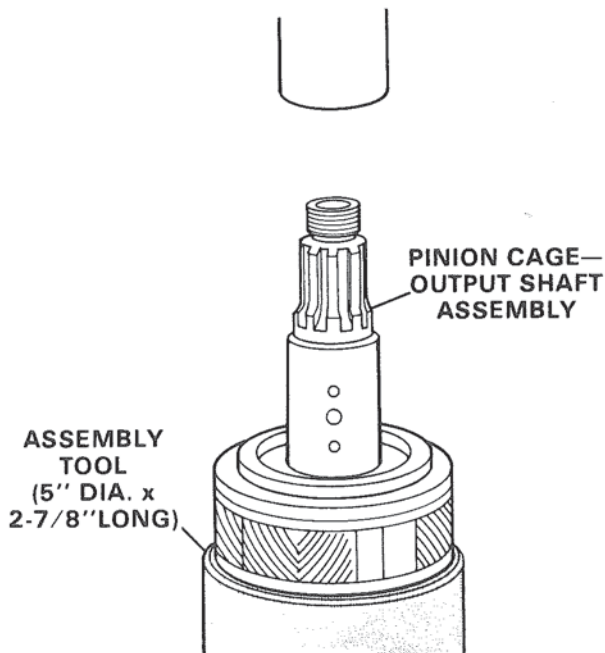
Pinion Cage and Output Shaft Assembly on Arbor Press.
